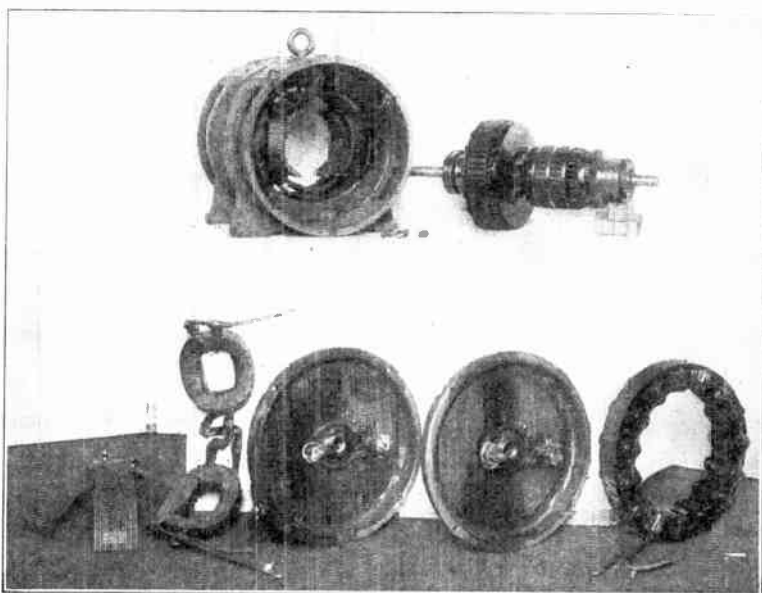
Exploded View of Crocker-Wheeler 2 KW. Motor Generator with Alterrator of "Wound Type."
